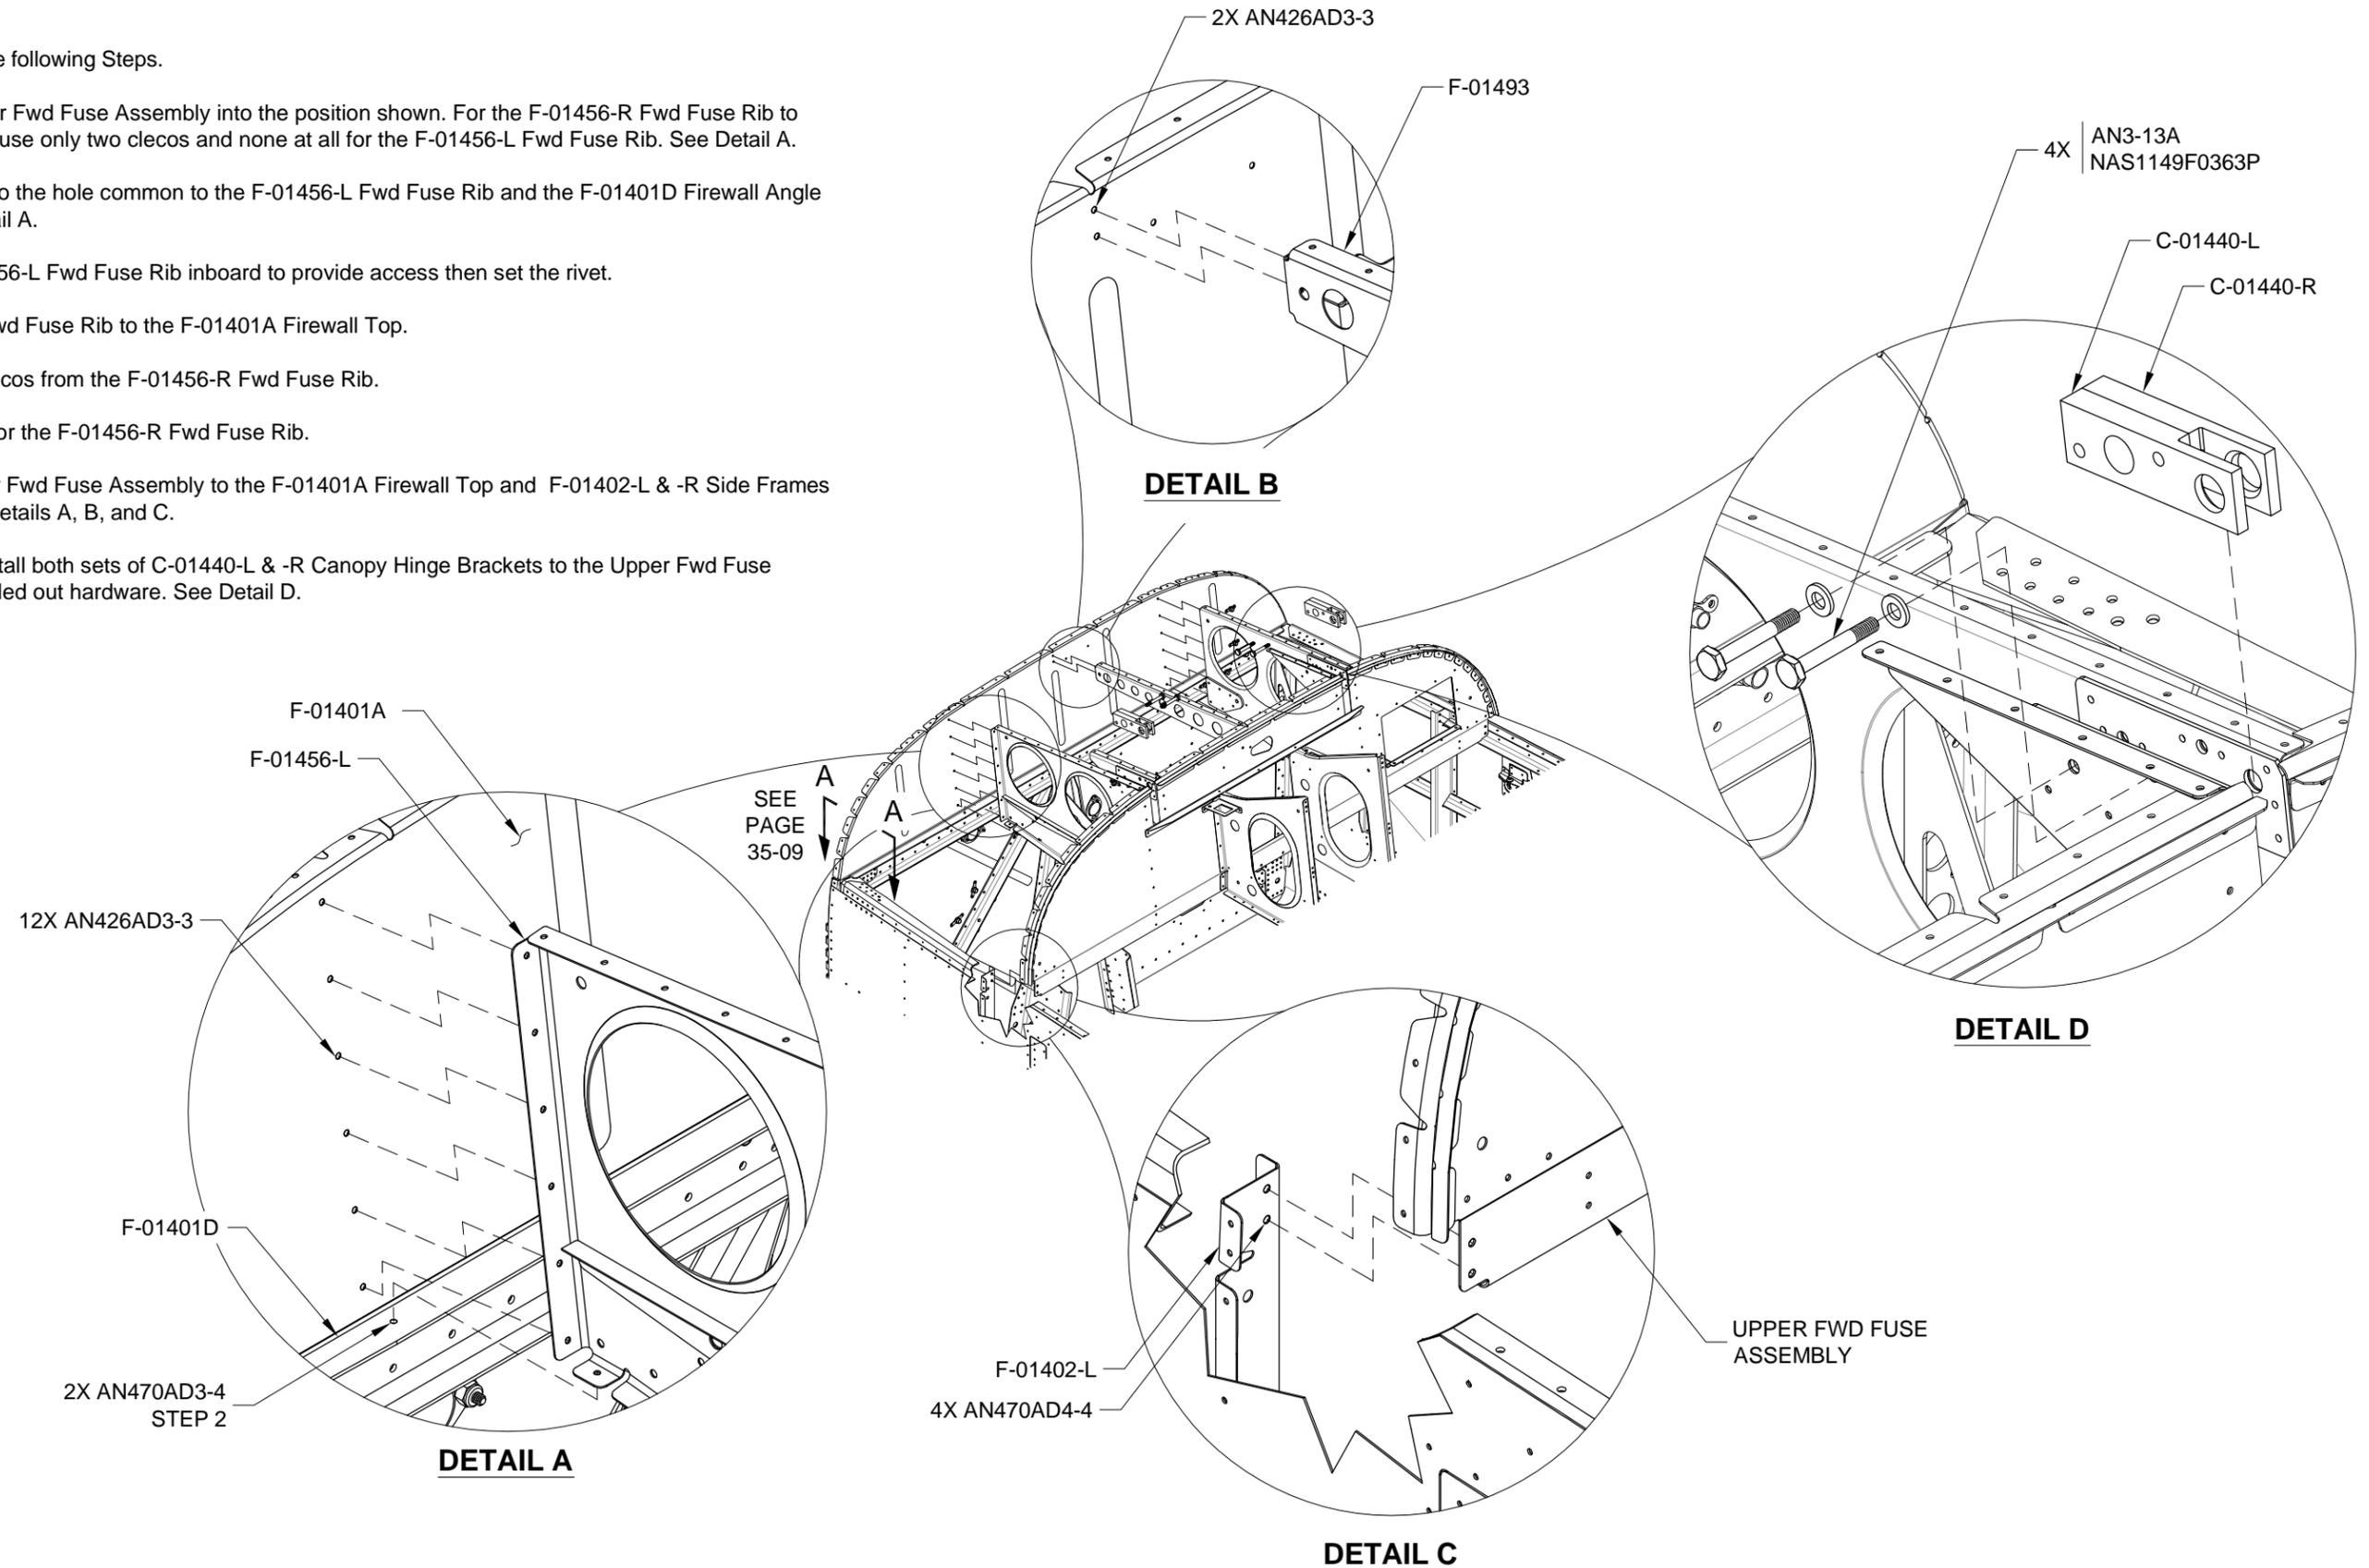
INSTALL UPPER FWD FUSE ASSEMBLY
